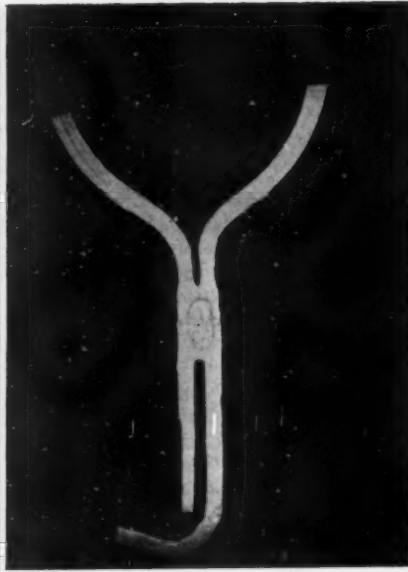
Section through stitch-welded seam, capsule No. 4. $\times 10$.
